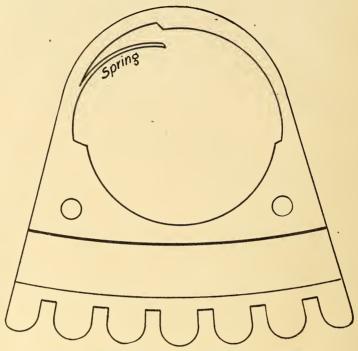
Bobbin chariot used on plain net machine; full size.
